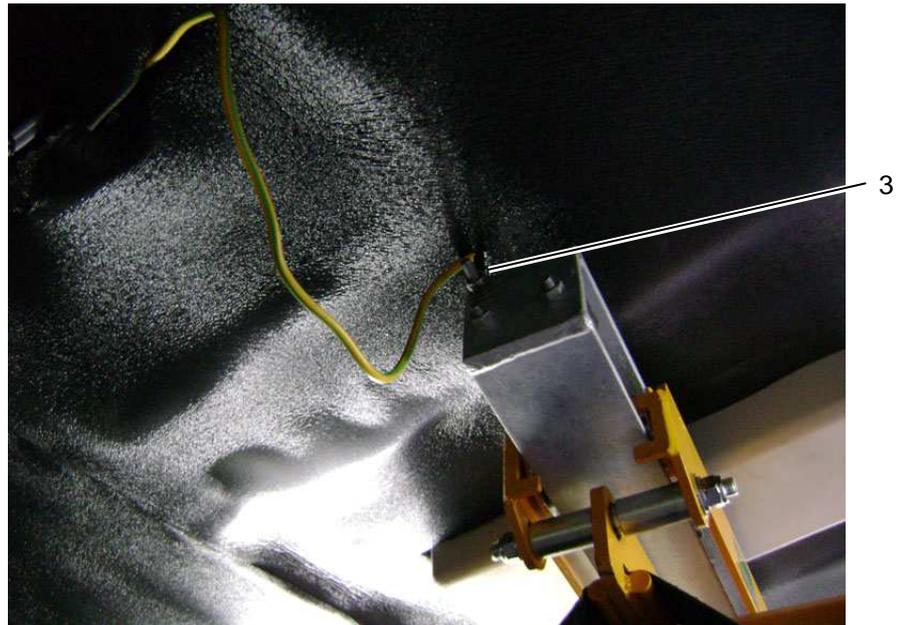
3 Grounding connection of the load-bearing beam
